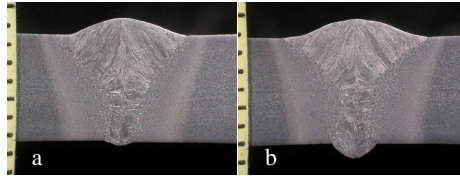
GMA welded joint, filler material: Union X96.
